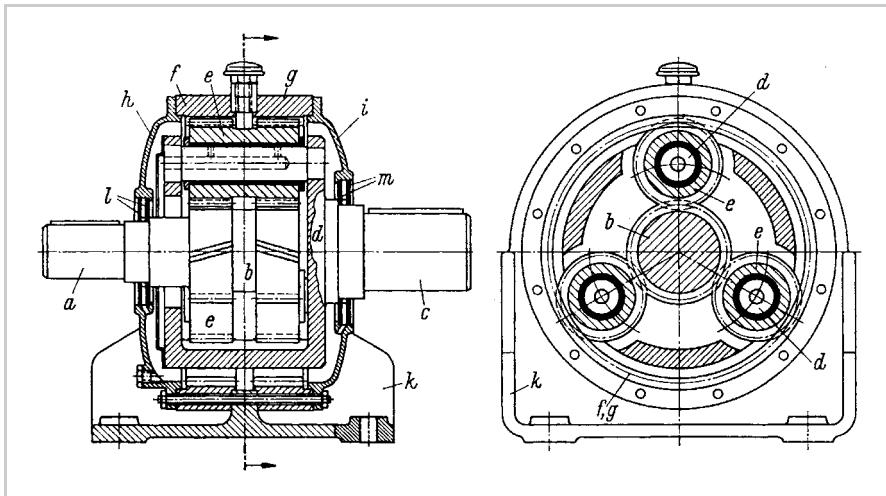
Epicyclic gearbox with balanced forces, after [7.97]
